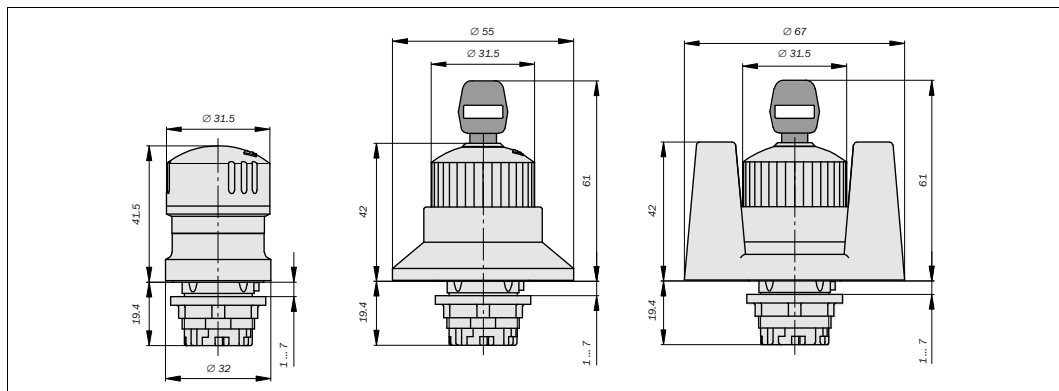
Dimensional drawings of the pushbuttons (mm)
